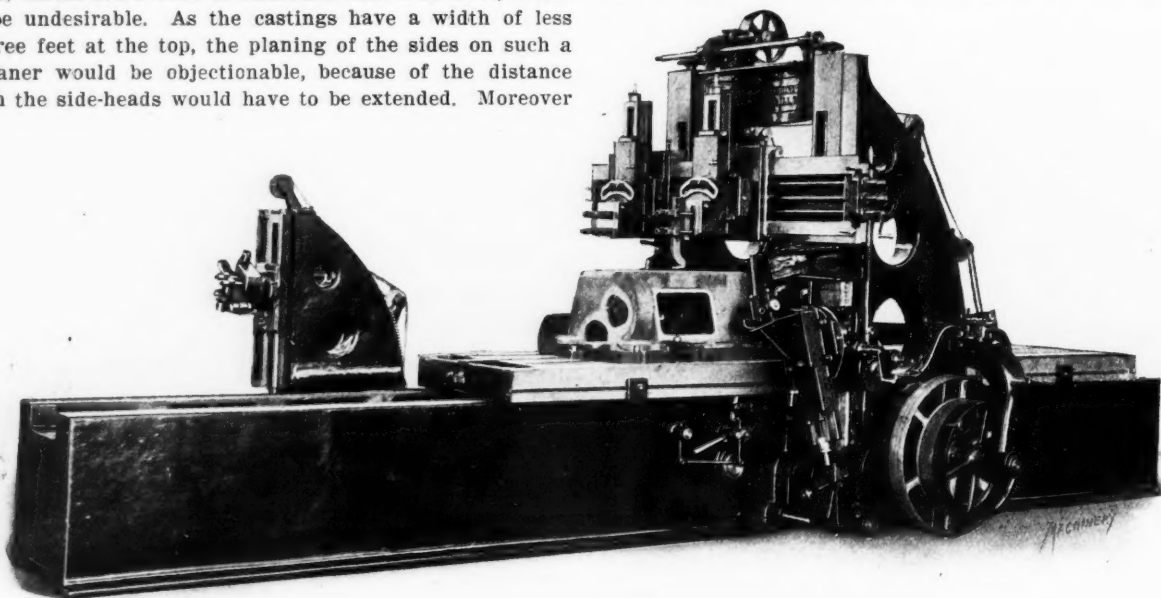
Special Planer built by Rockford Machine Tool Co., Rockford, Ill.
